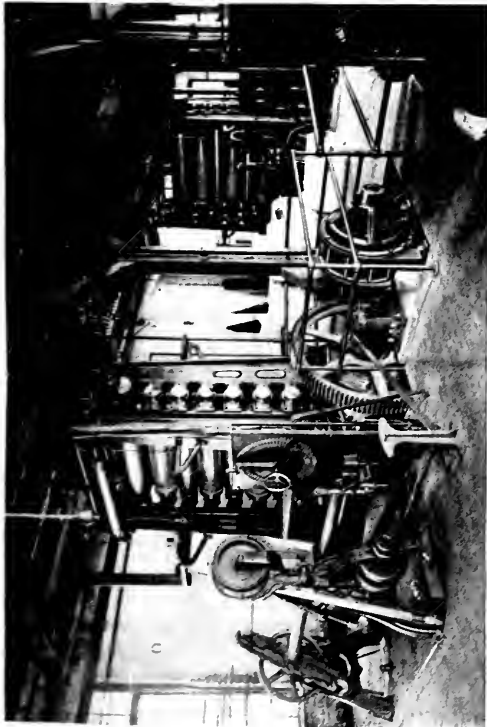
75-h.p., 514-r.p.m., 550-volt Slip Ring Induction Motor and Controlling Panel Geared to Finishing Calenders. Louis DeJonge Company, Fitchburg, Mass.
